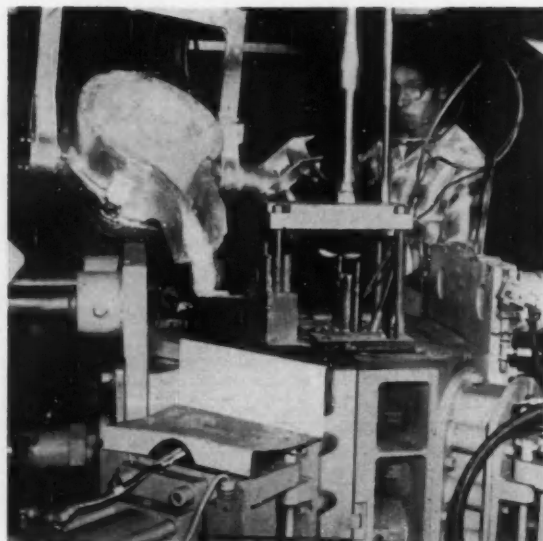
View of cylinder block mold machine with dies closed and metal being poured.
